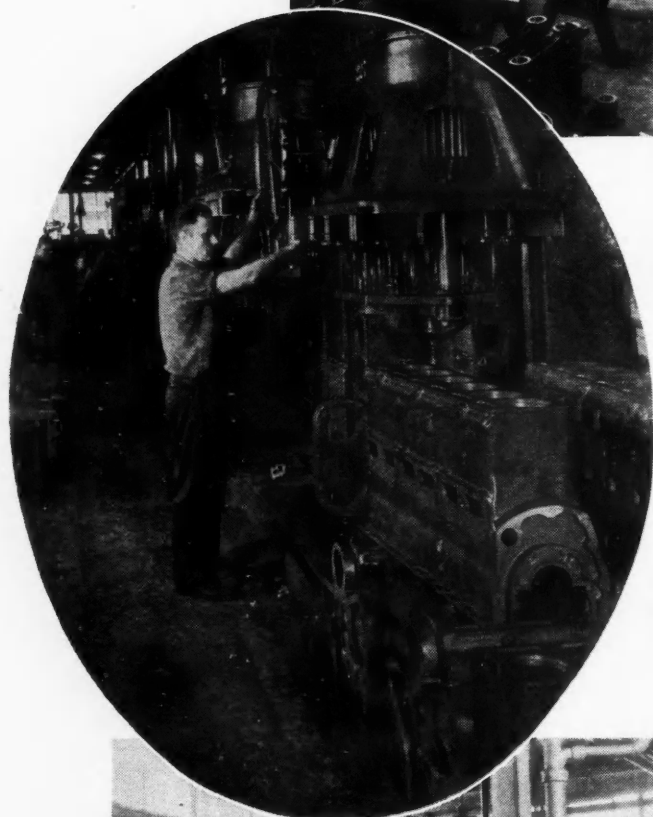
(Above) Sundstrand machine set up for milling crankcases. The specially designed machine must produce accurately and smoothly the milled pads for the cylinder bolt-down surfaces. It is arranged to accommodate a number of different crankcase designs.
